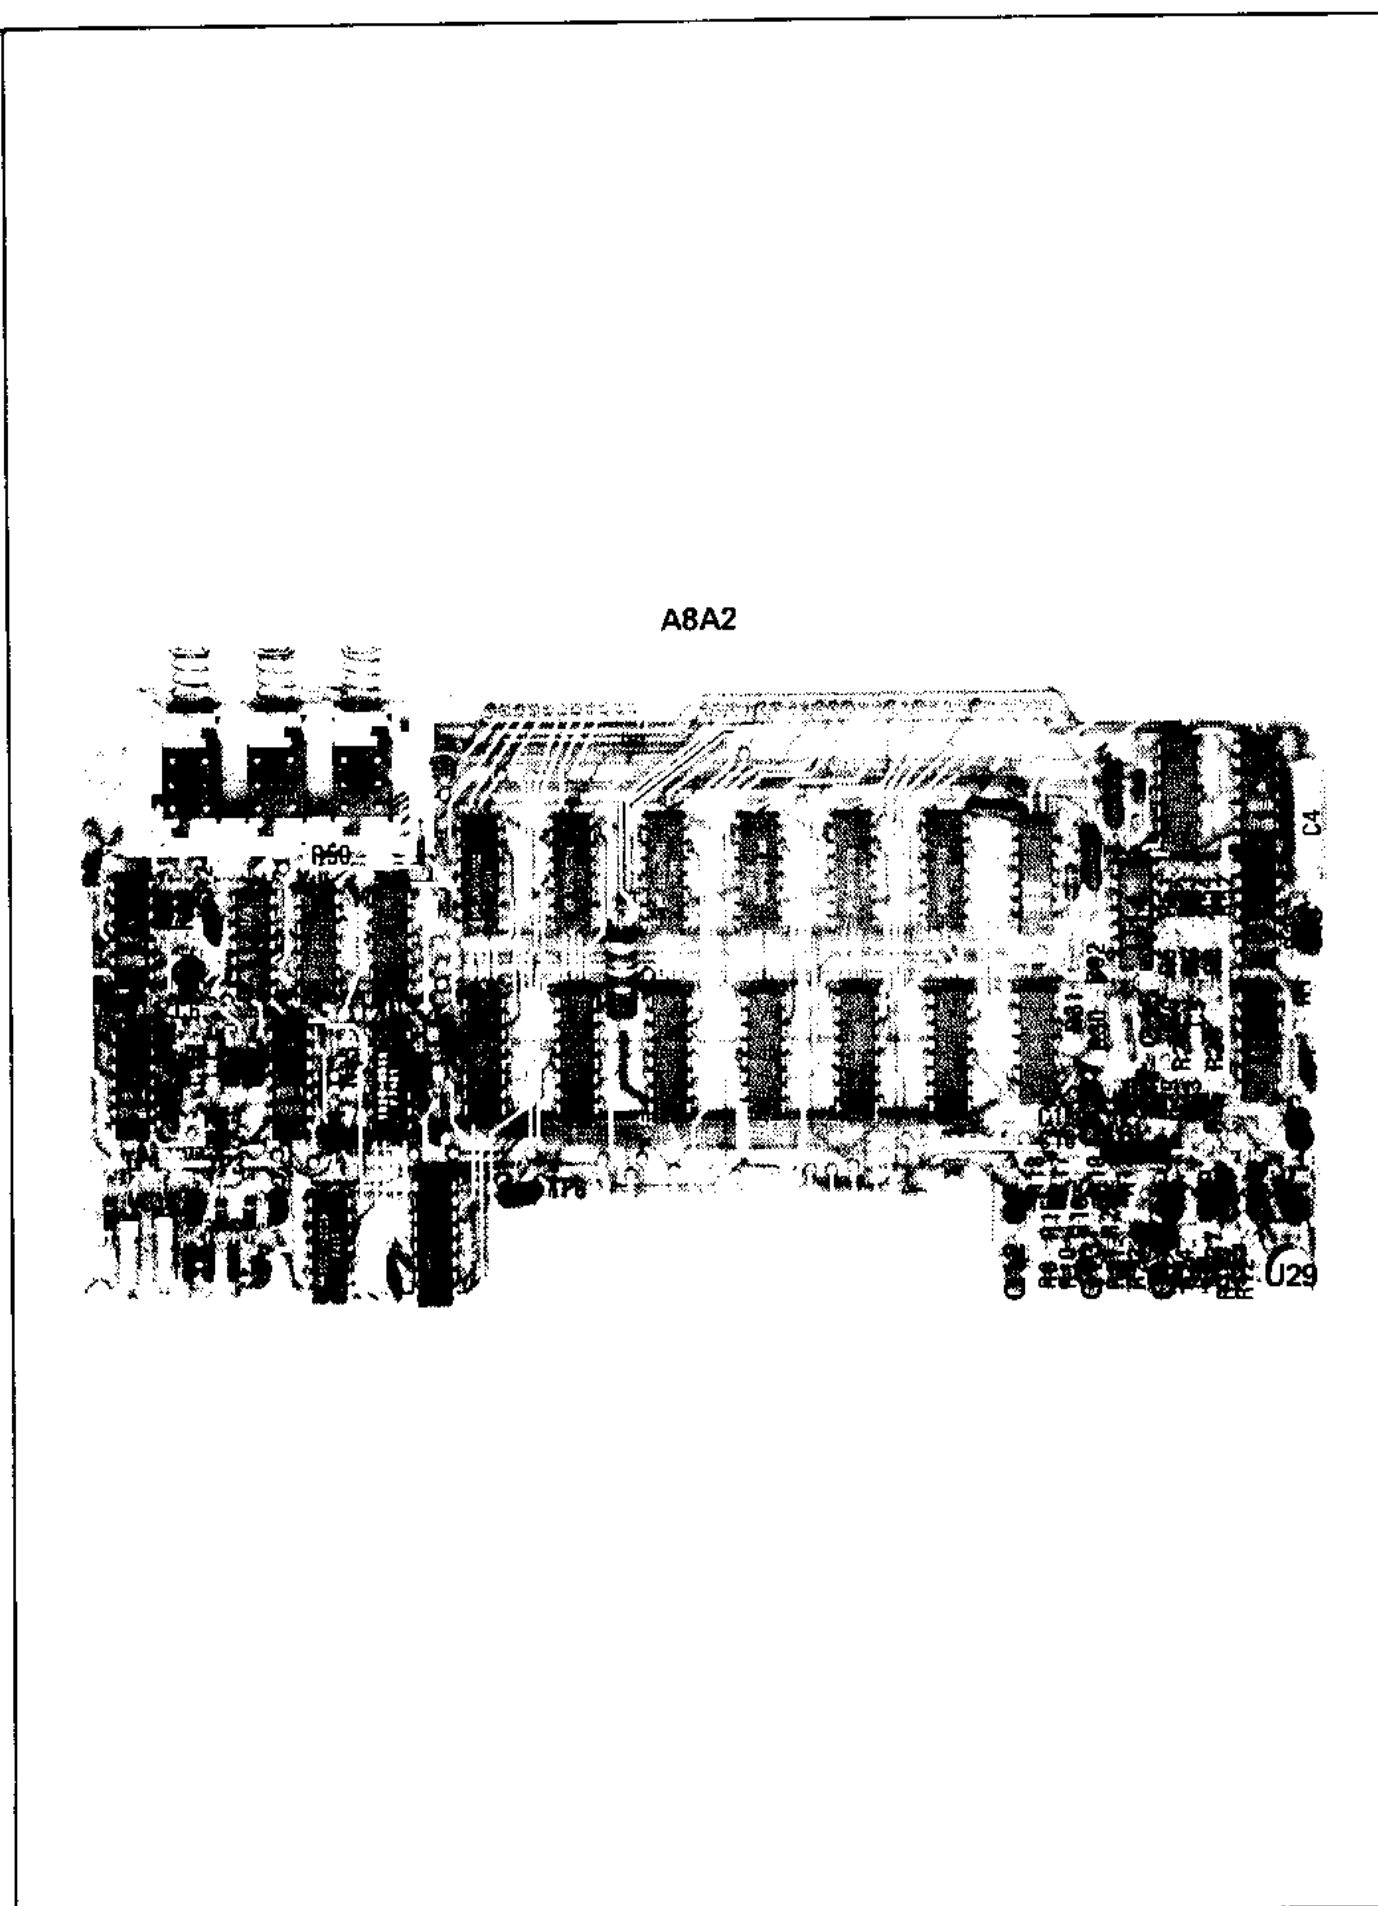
P/O A8A2 Counter/Lock Board Assembly Component Locations
